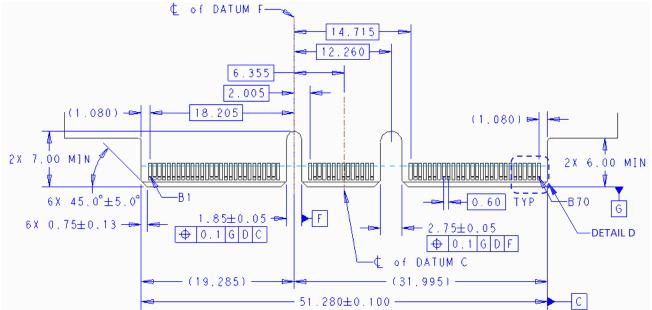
AIC 1C MATING CARD DIMENSIONS
